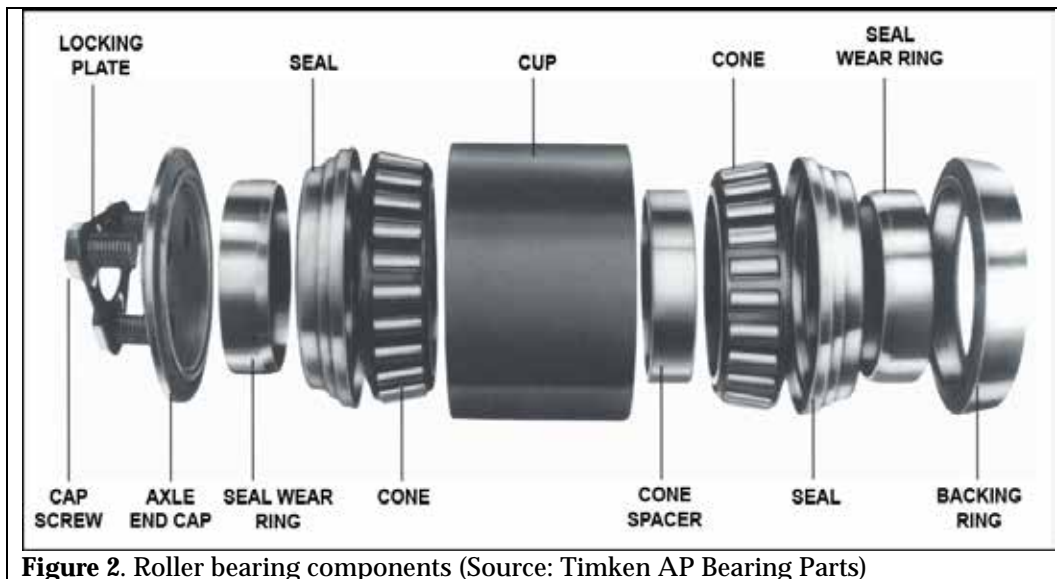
Roller bearing components (Source: Timken AP Bearing Parts)
